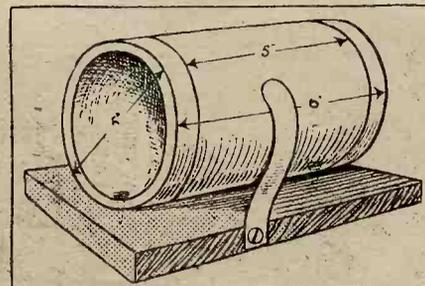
Fig. I.—This shows the inductance former without the coiled wire but with brass arm in position.
